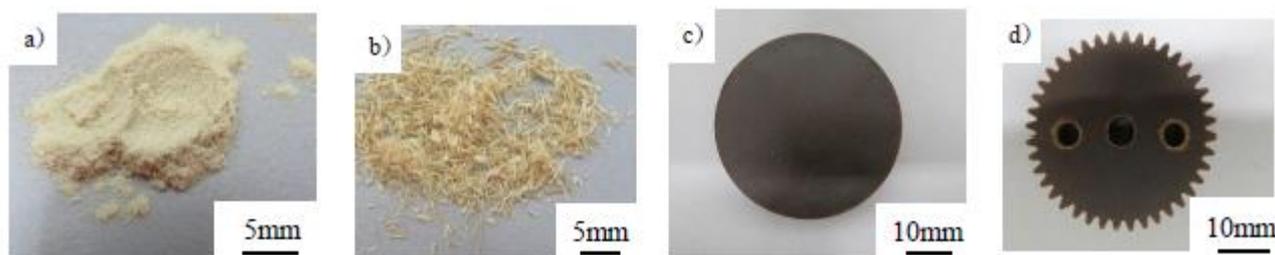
Manufacturing process of bamboo gear a) bamboo powder, b) bamboo fiber, c) pre-product, and d) spur gear
